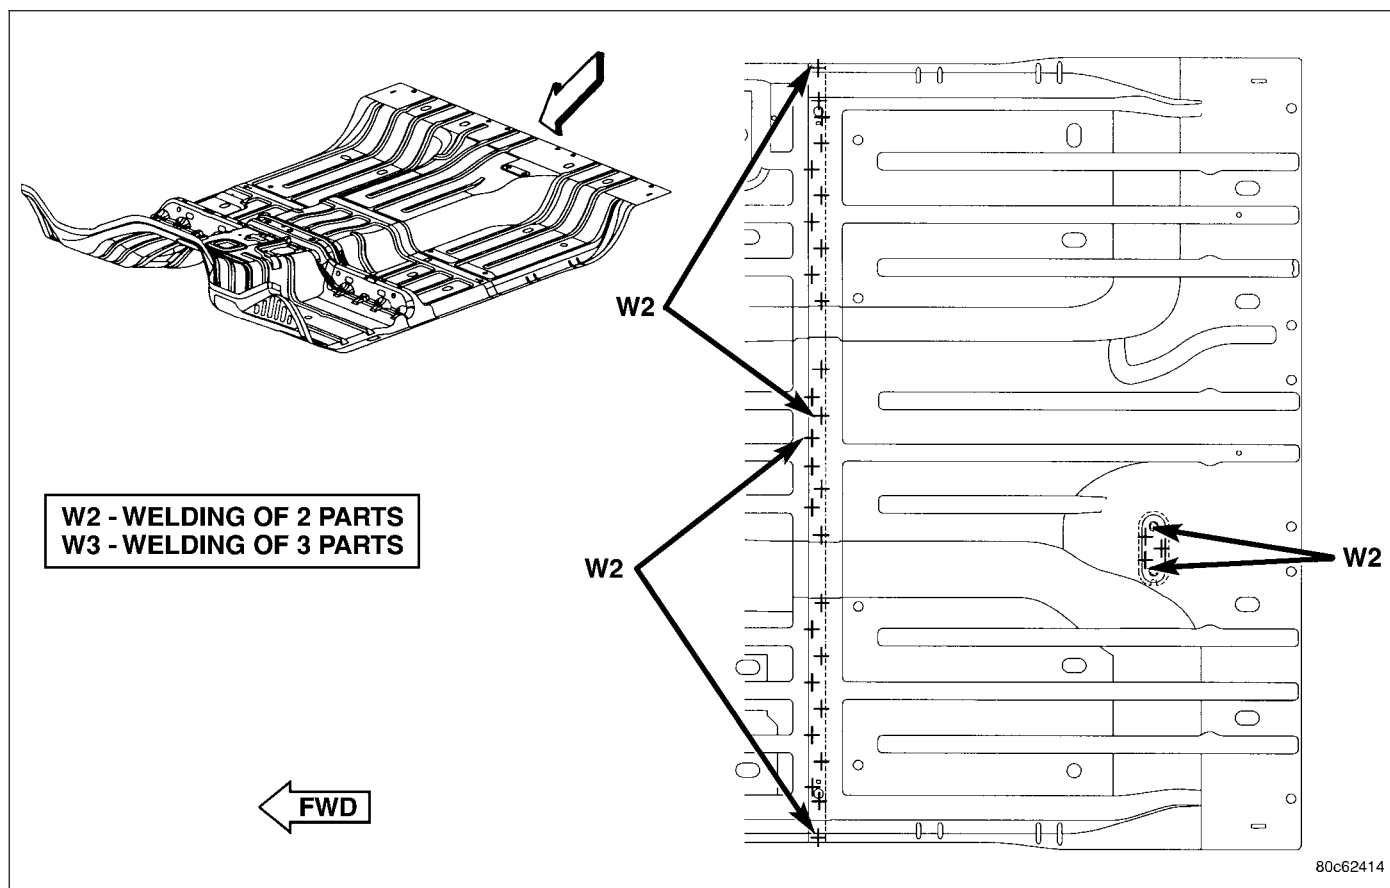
REAR SEAT MIDDLE MOUNTING PLATE - QUAD CAB
